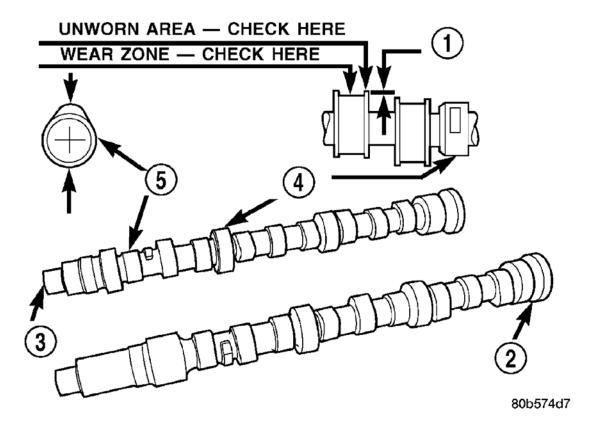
Camshaft Inspection Courtesy of CHRYSLER LLC
